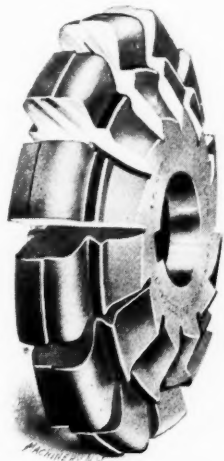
Gould & Eberhardt Improved Stocking Cutter for Gear Work.
